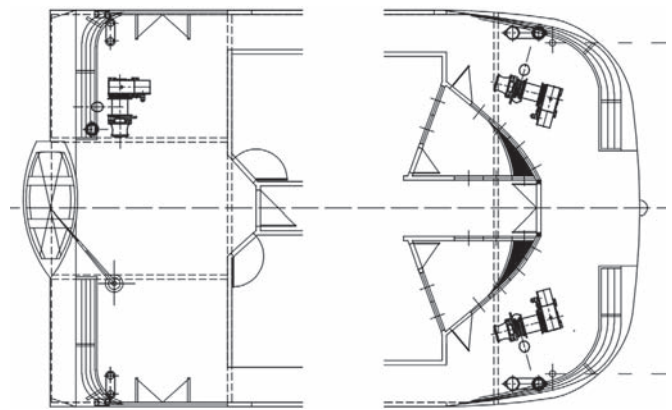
Example arrangement of the anchoring and mooring equipment on the pusher .
